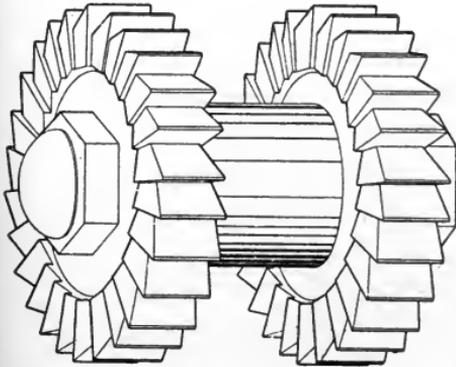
Side Milling Cutters Mounted as a Heading or Straddle Mill
